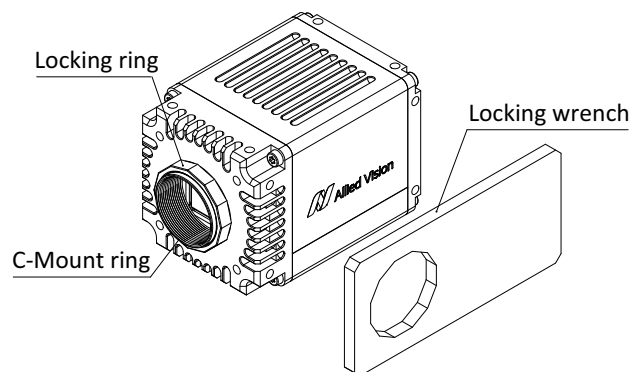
Goldeye camera with C-Mount adapter Type 2 and locking wrench
